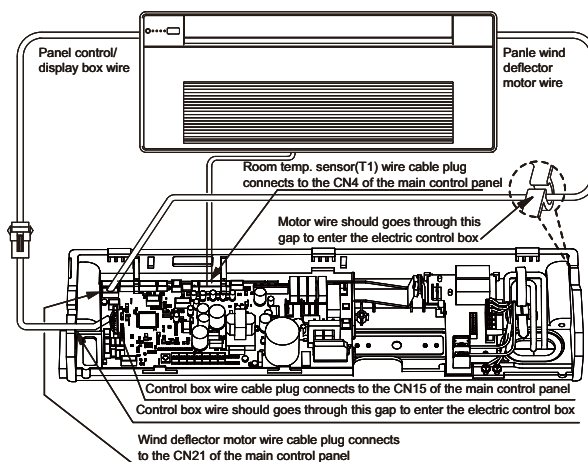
Electrical Wiring for Panel Assembly (005-012)
